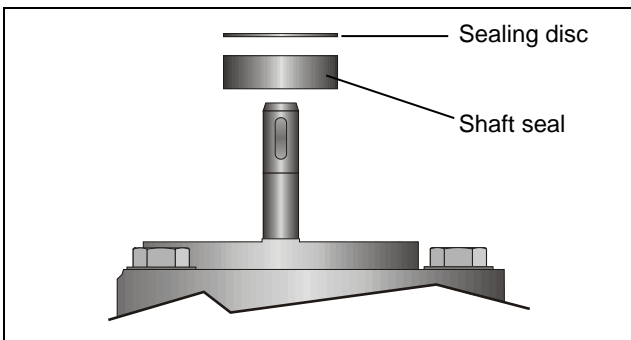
Withdrawing the sealing disc and the shaft seal attachment
